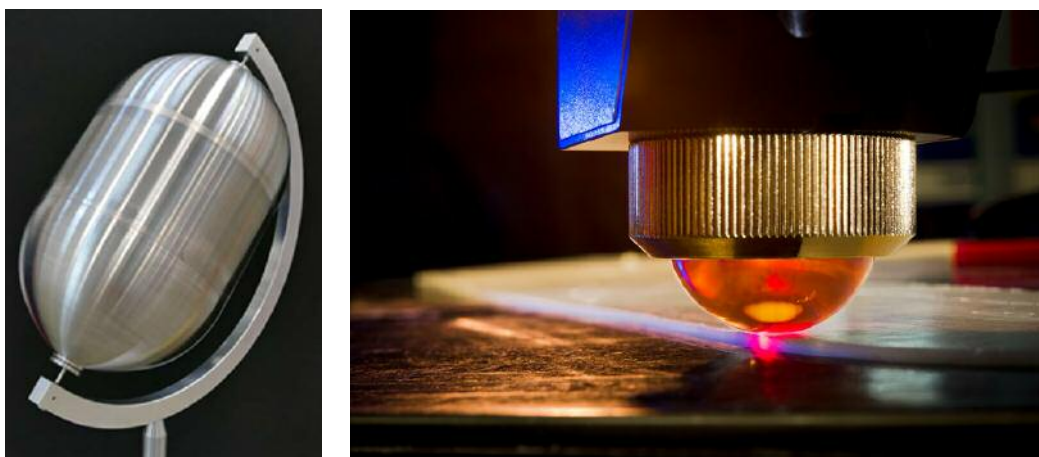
Left, The prototype propellant tank manufactured using stationary shoulder FSW of two hemispherical domes with a cylindrical section. Two girth welds are quite visible. Right: Laser welding of thermoplastic material (Courtesy of TWI)).
